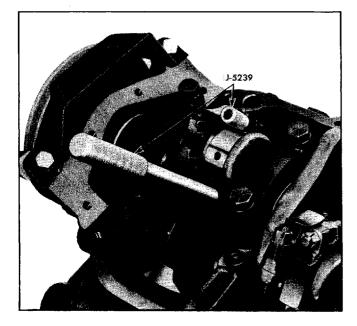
Removing Connecting Rod and Piston Assembly
